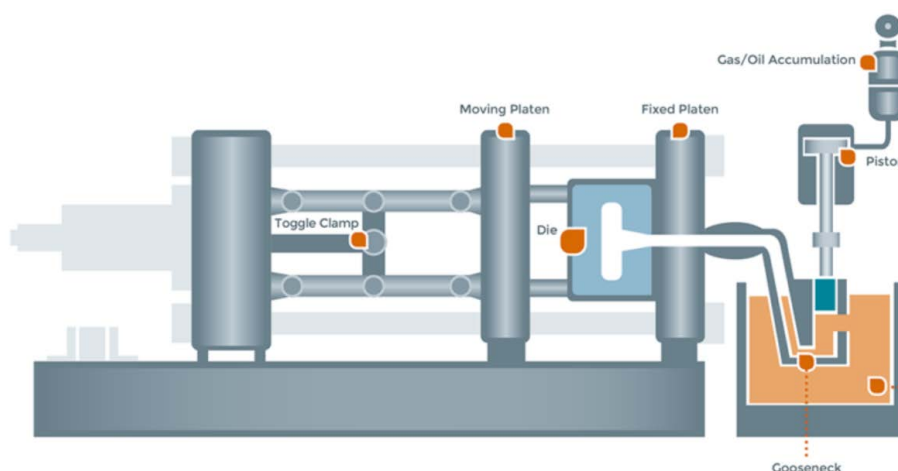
Hot chamber die casting machine. Source: bscdiecasting.co.uk
